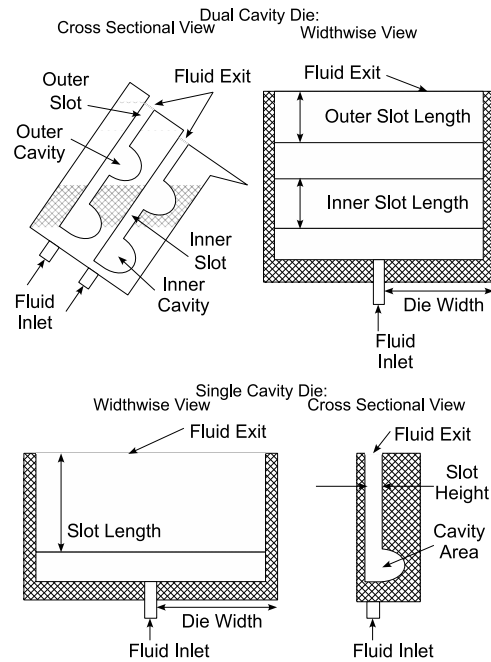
Typical Single and Dual Cavity Coating Die Geometry
